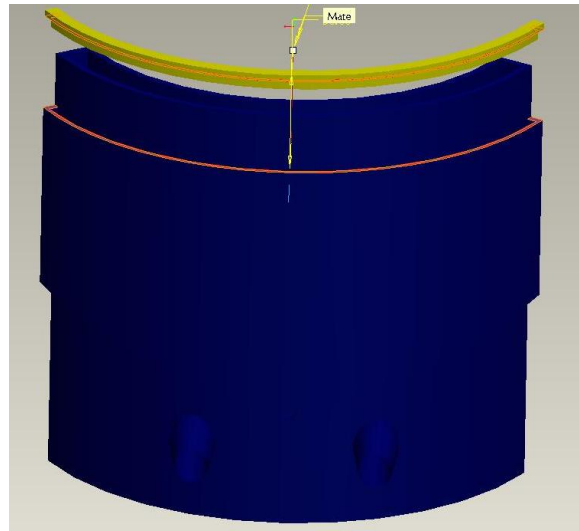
ProEngineer model of the plug used to fill the support material removal hole at the inlet of the oxygenator module.
